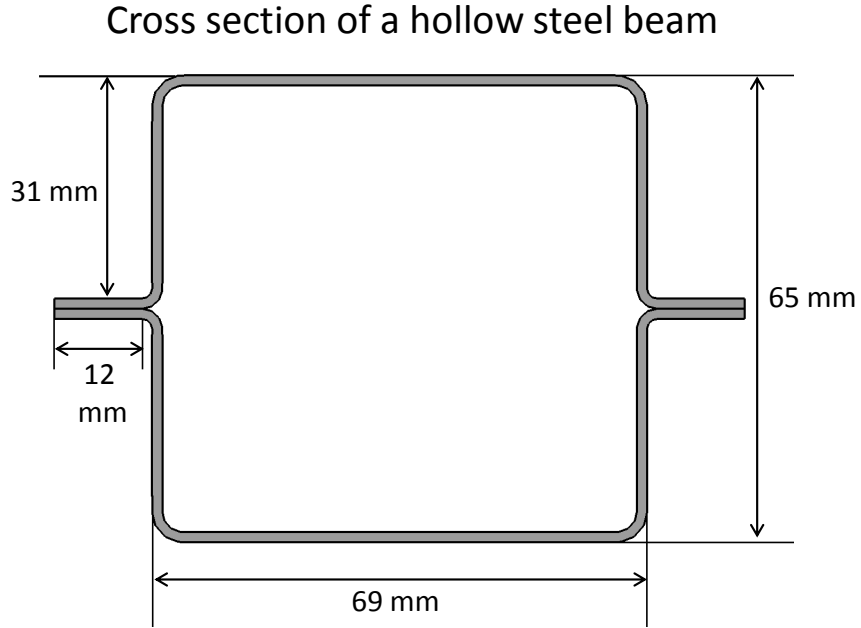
Dimensions of the cross section of the hollow steel beam.
